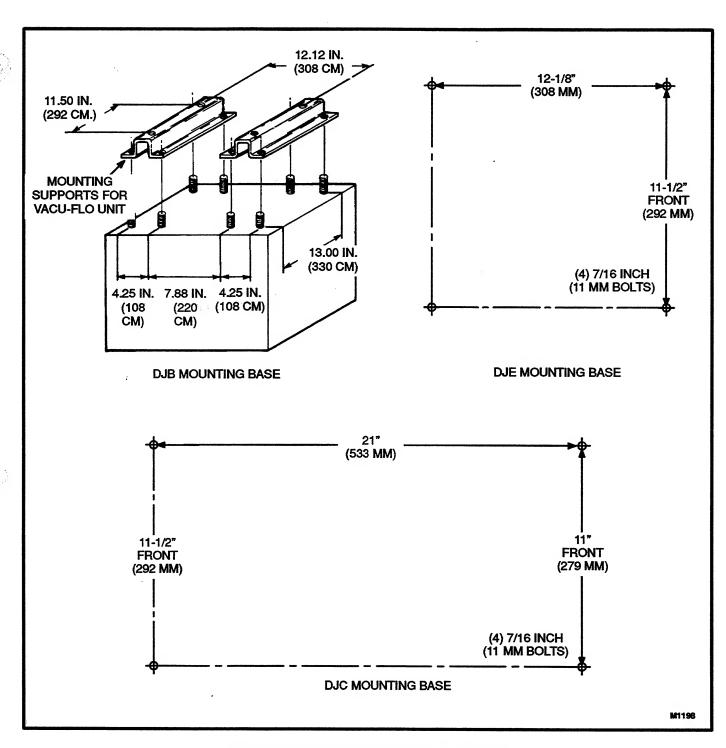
MOUNTING BASE DIMENSIONS
